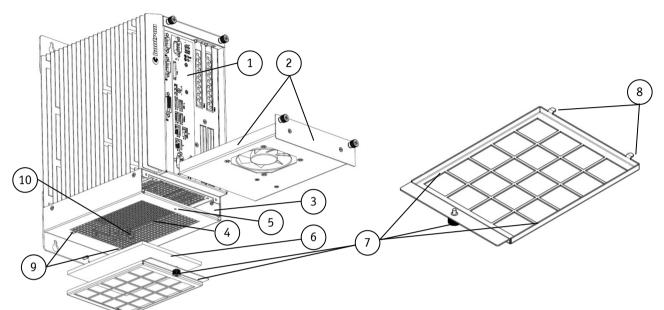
KBox C-101-2 with removed fan tray and removed air filter
